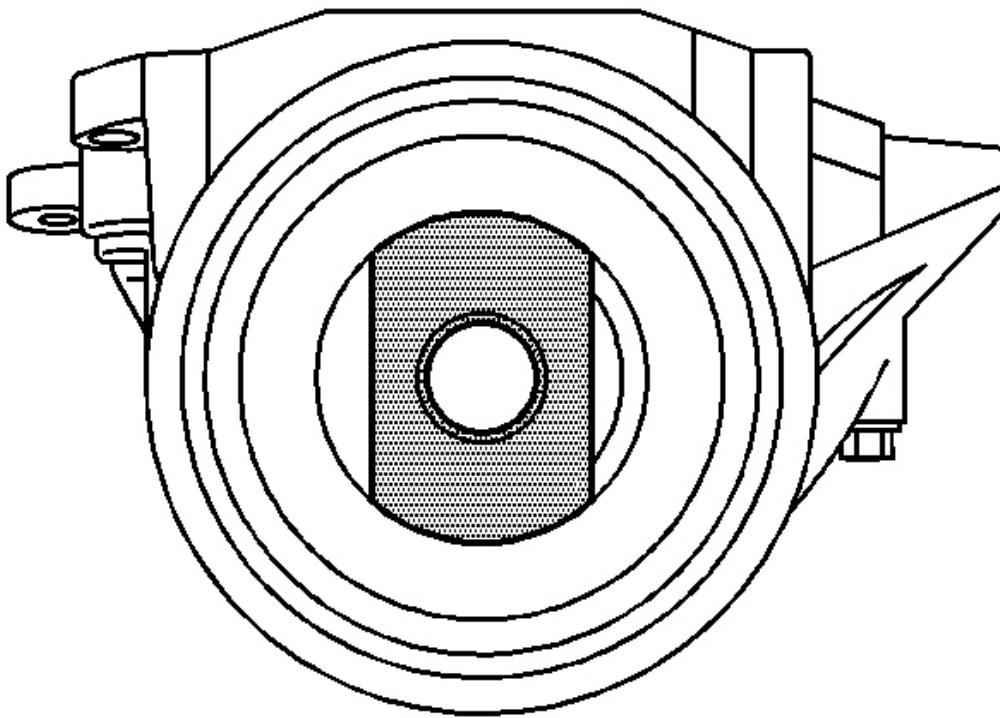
View Of J 45228-4 & Outer Pinion Bearing Cup
